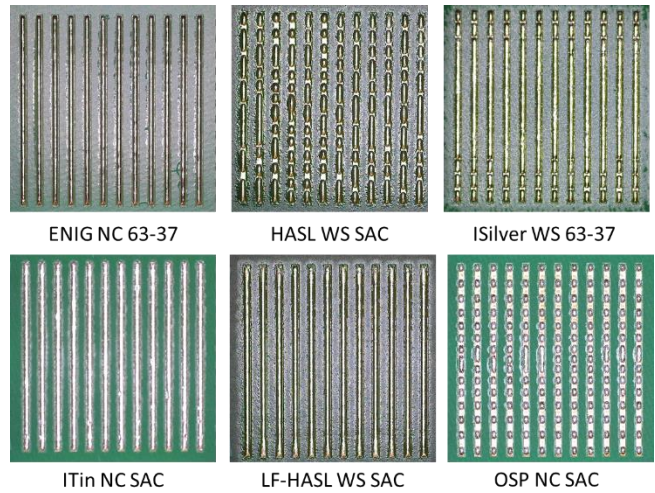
Pictures of Solder Paste Wetting on the Surface Finishes
